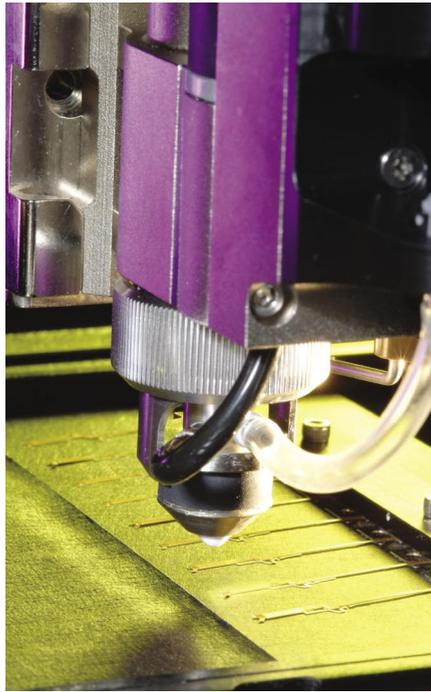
Jetting technology enables surface mount adhesive to be applied after solder paste without disturbing the paste.
